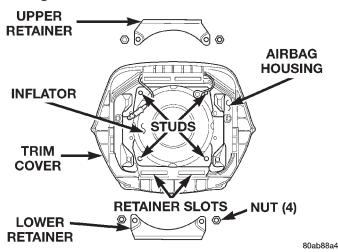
Driver Side Airbag Trim Cover Retainers Remove/Install
